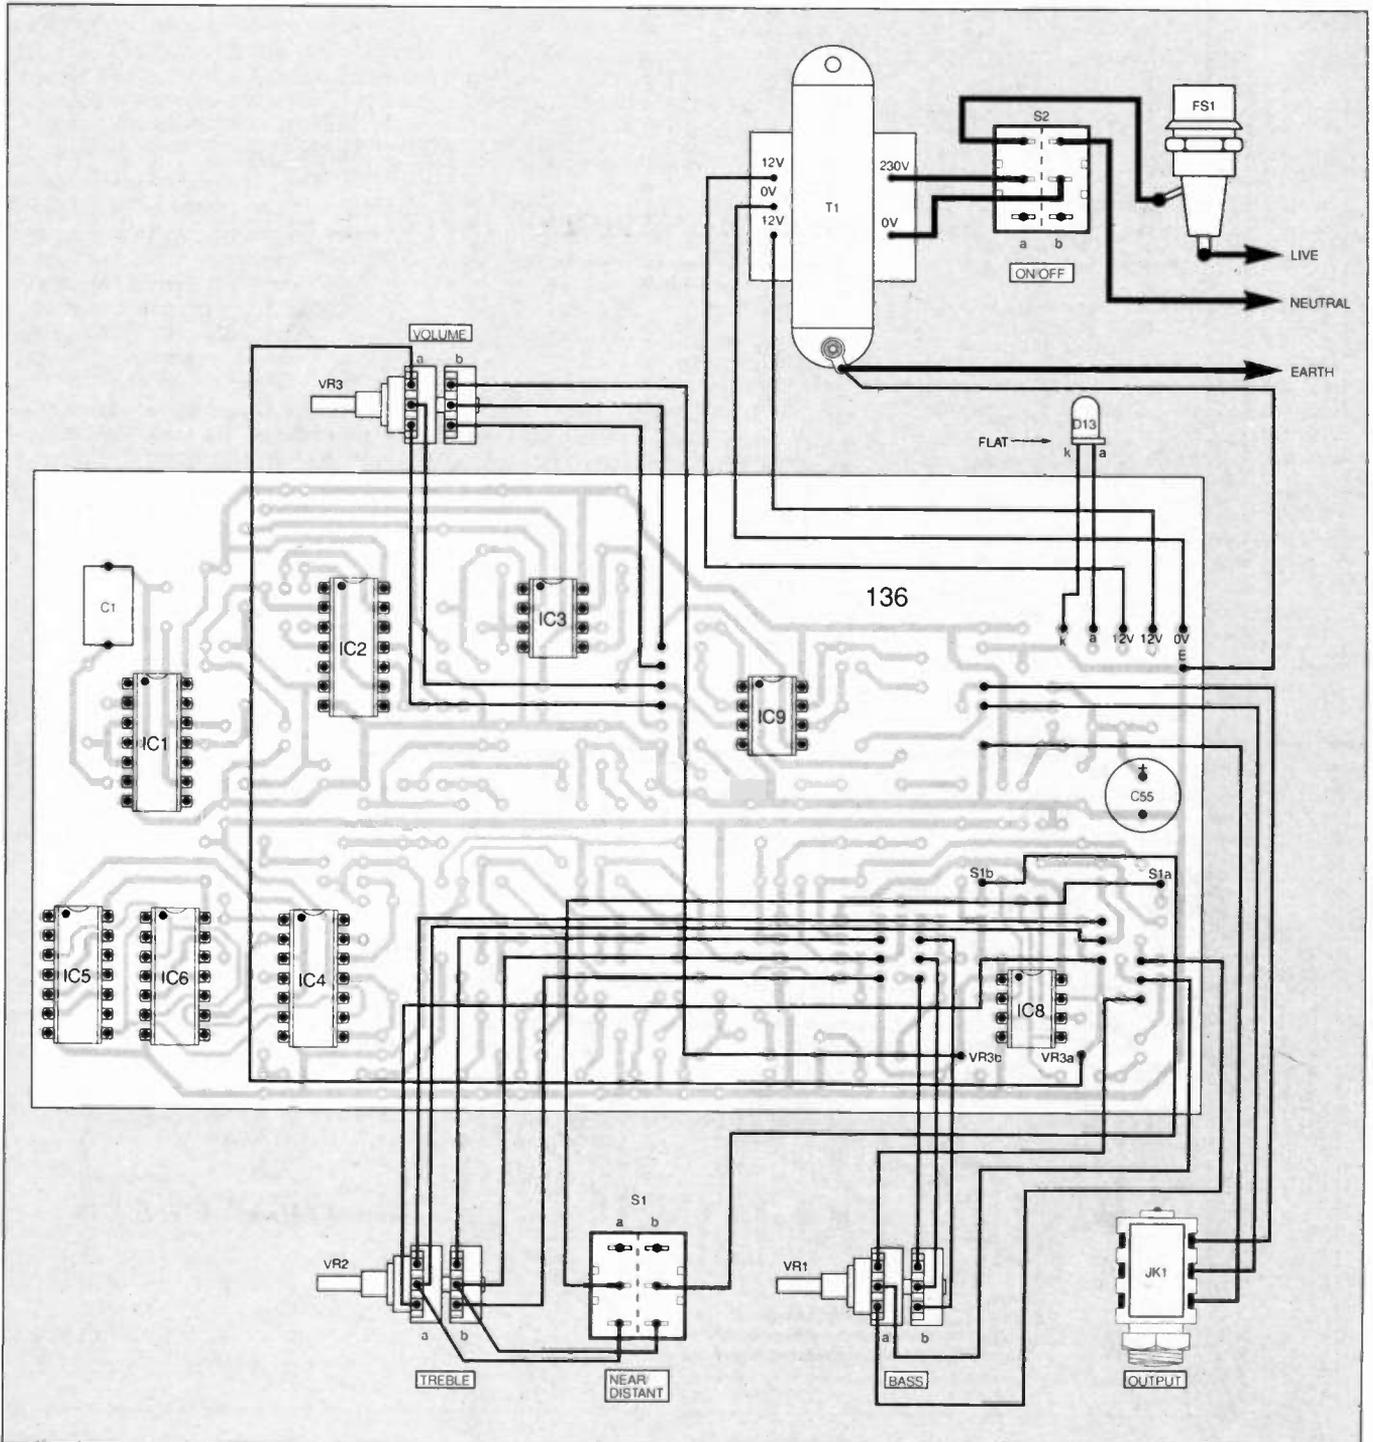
Interwiring between off-board components and the p.c.b. The top right corner of the p.c.b. may need to be cut to give space for the power supply components, see photographs.
